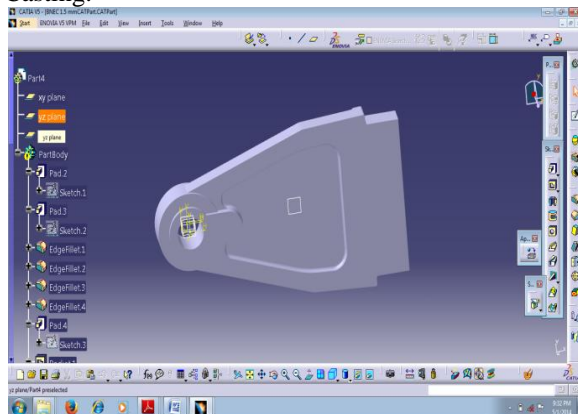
Generated geometry of the Boom Nose End Casting
